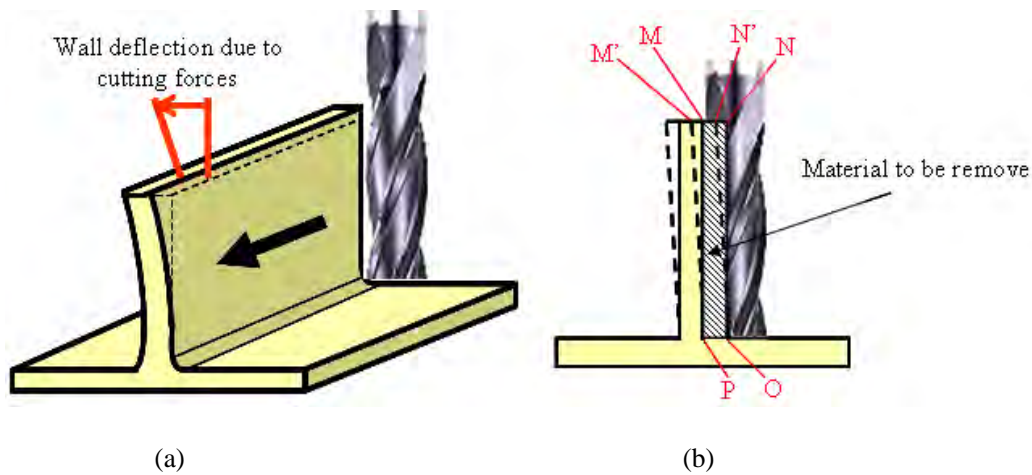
Dimensional surface errors produce in machining thin-wall feature.
